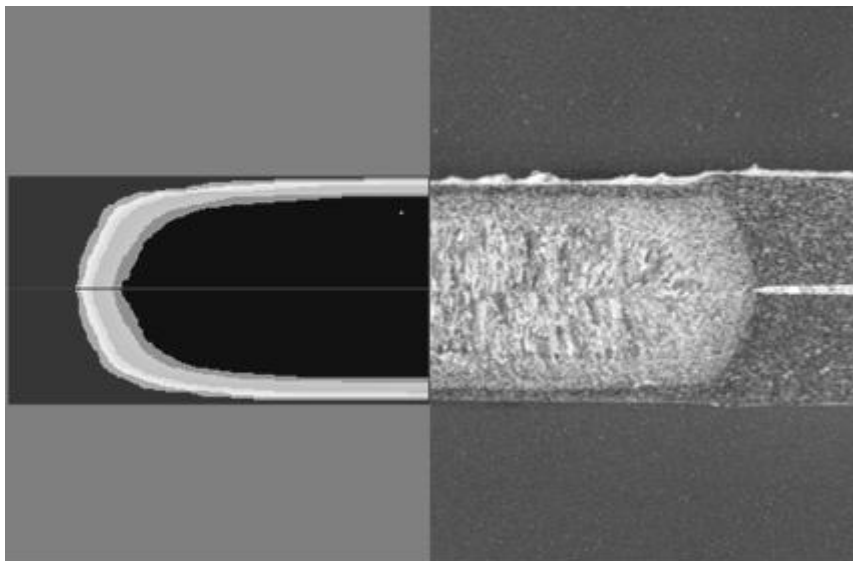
Experimental and simulated weld nugget and heat affected zone for 1,2 mm thick uncoated DC04 steel sheet welded to itself. Welding was done using 6 mm type B electrodes, with a 3,5 kN electrode force and a welding current of 8,5 kA applied for 20 cycles (50 Hz).
